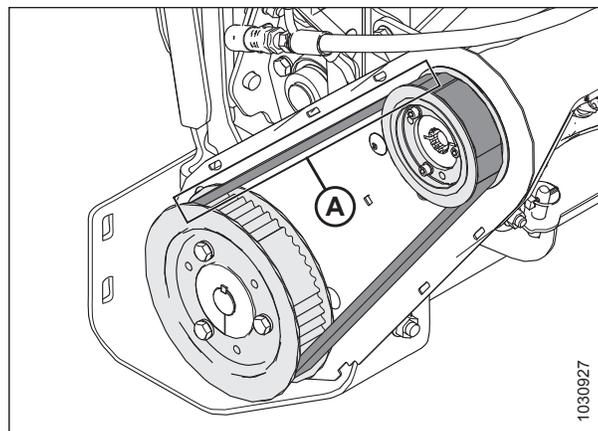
Drive Belt and Pulleys – Conditioner Drive Motor
